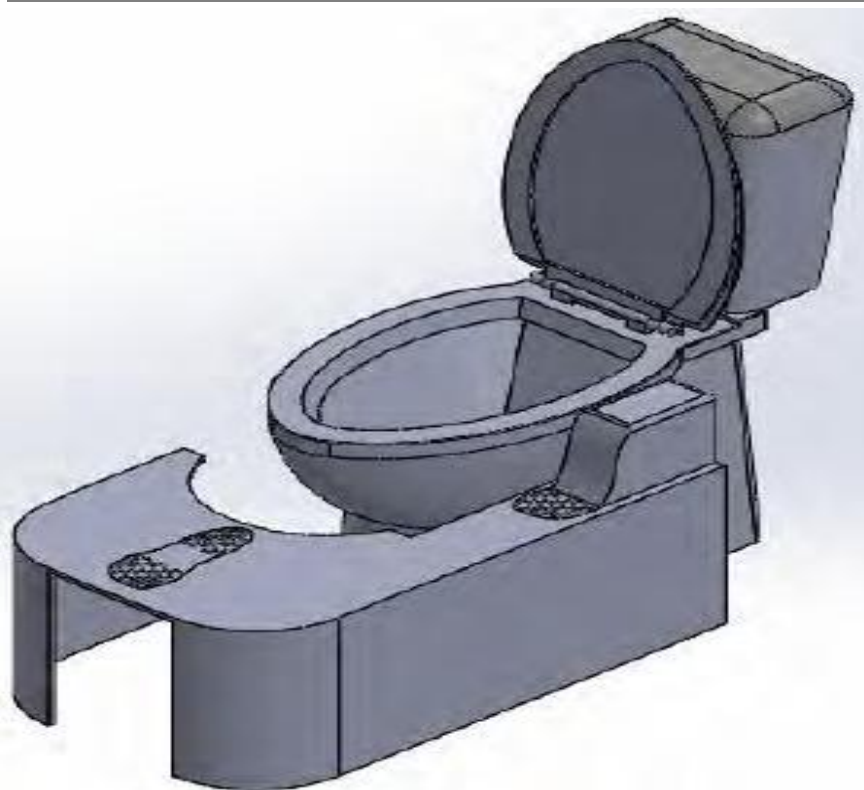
CAD assembly of the proposed toilet stool with the toilet bowl
